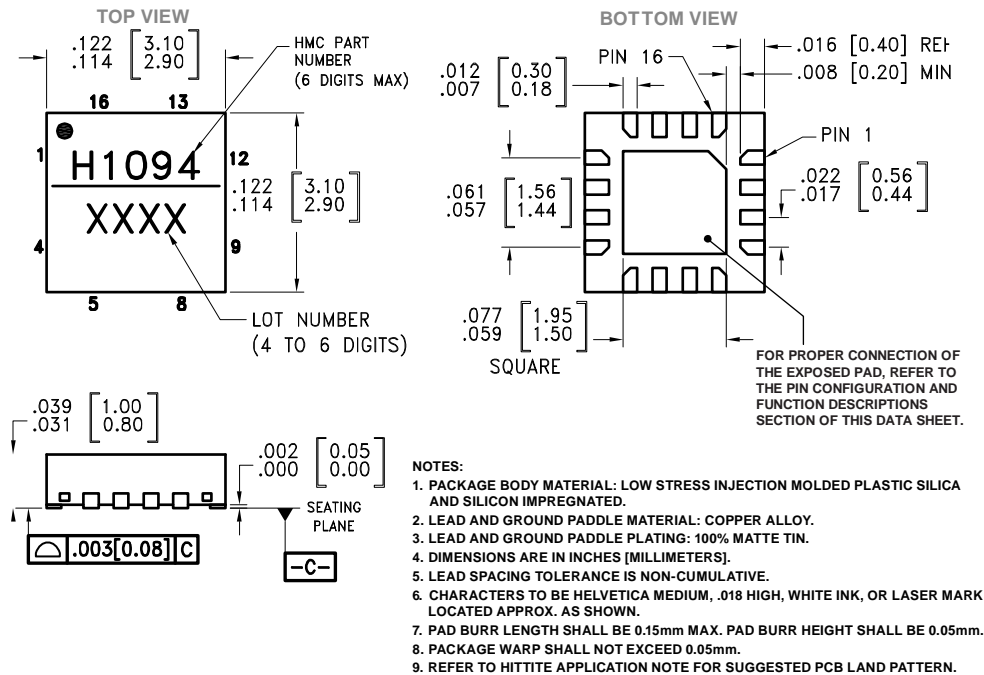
16-Lead Quad Flat No-Lead Package [QFN]
